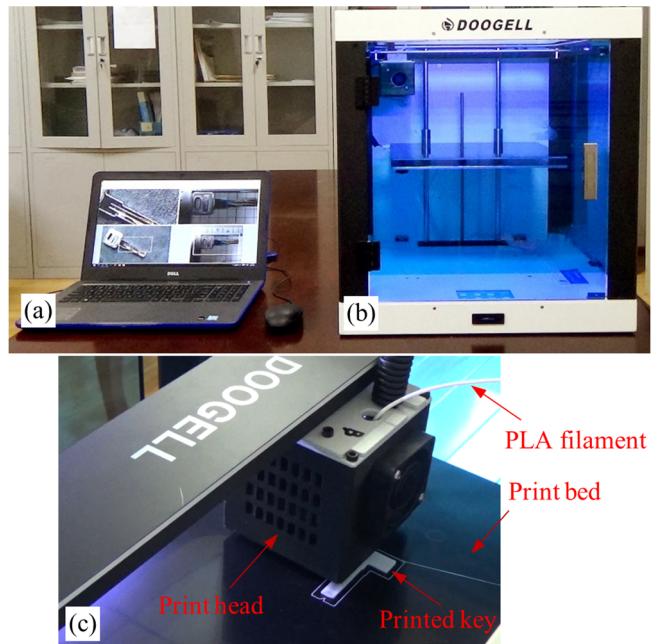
Equipment devices (a) the computer, (b) the Doogell D300 3D printer, and (c) the printing process.
